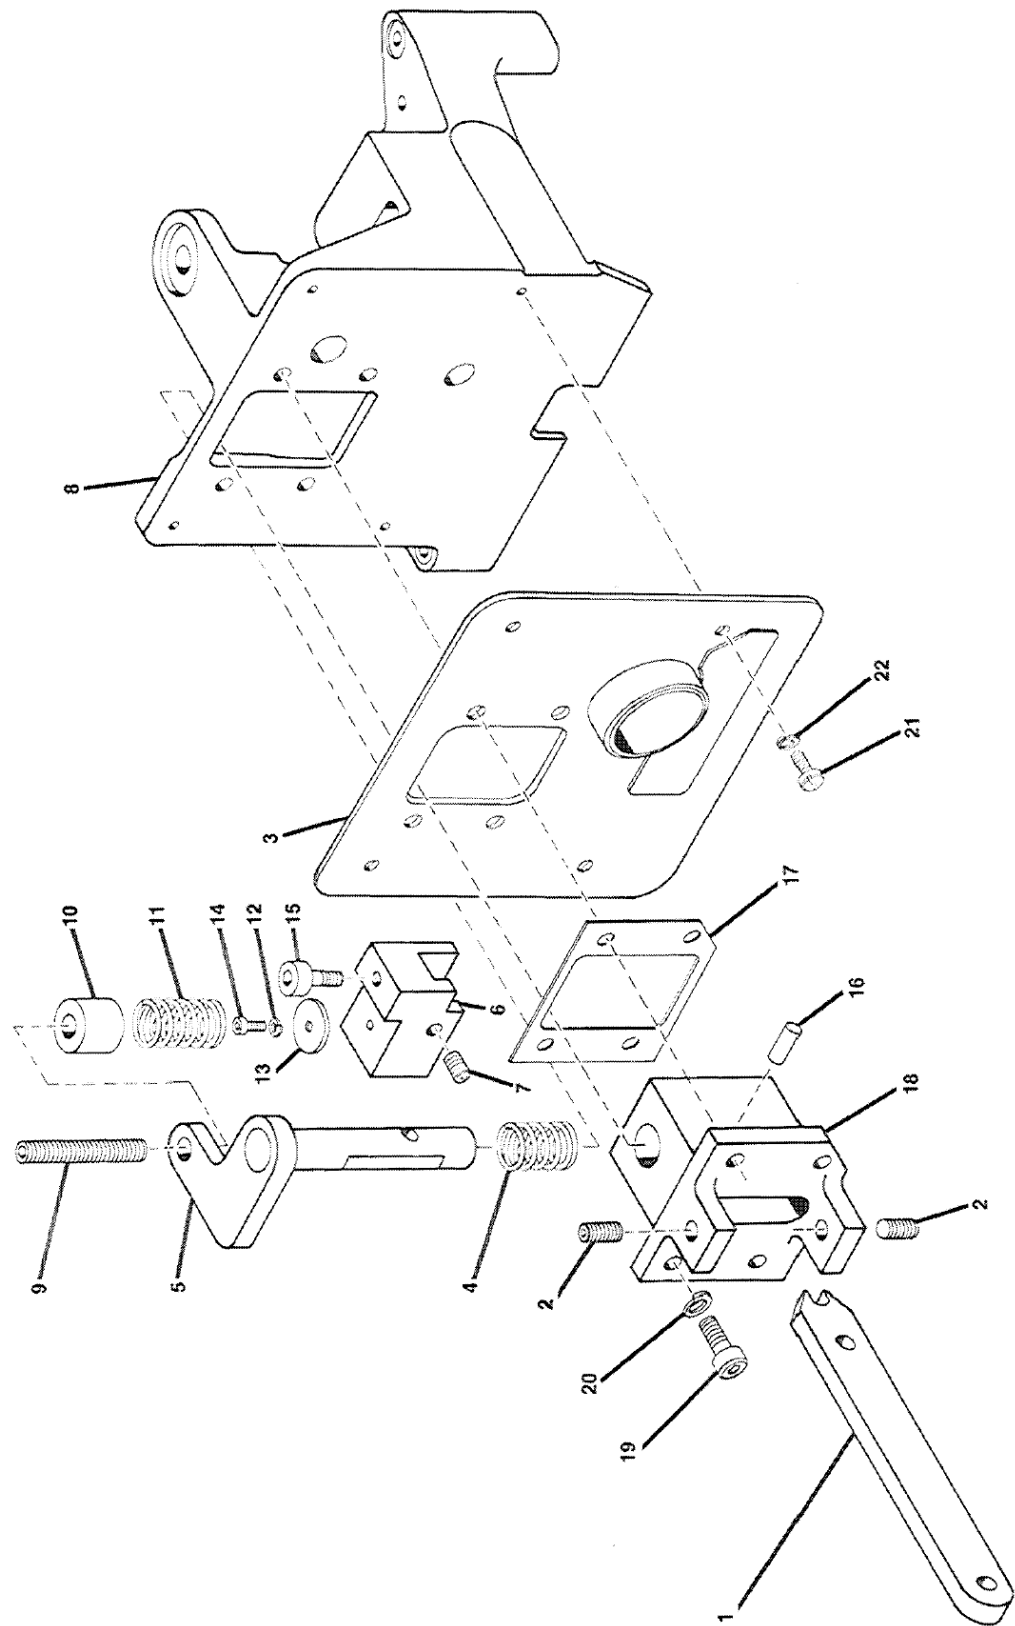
Parts for the Lever Speed Setting Equipment for the PGA Governor
